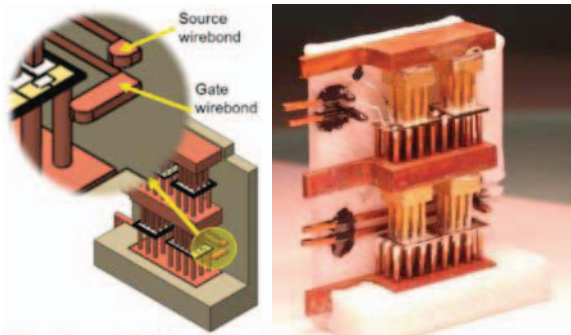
Complete stacked assembly with all electrical and thermal contacts.
